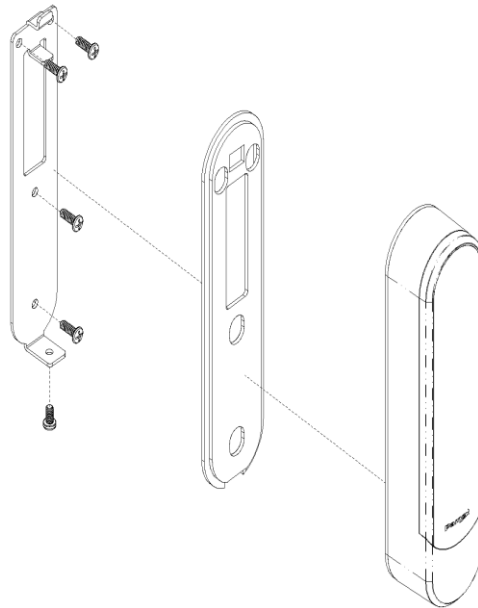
Enkore Smart EKS-WR1N MOUNTING TO SINGLE GANG RECESSED OUTLET BOX
